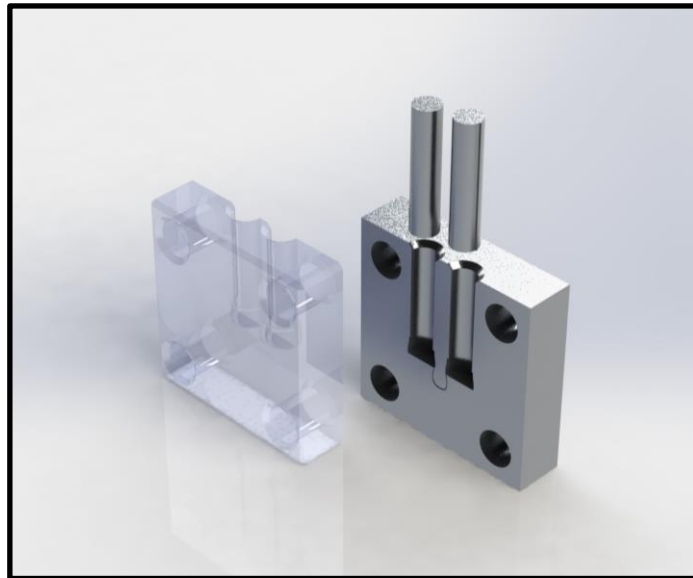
Injection Mold Tool Solidworks Design (Half-clear for image purpose)
